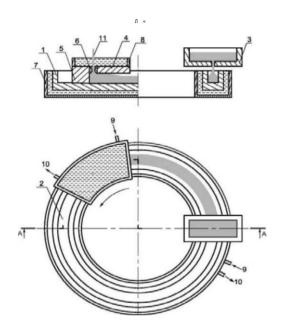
Device for cooling a continuous metal castingpressing installation tool [17]:
